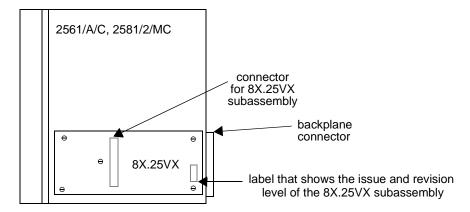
8X.25VX subassembly mounting on the 2561/A/C and 2581/2/MC
